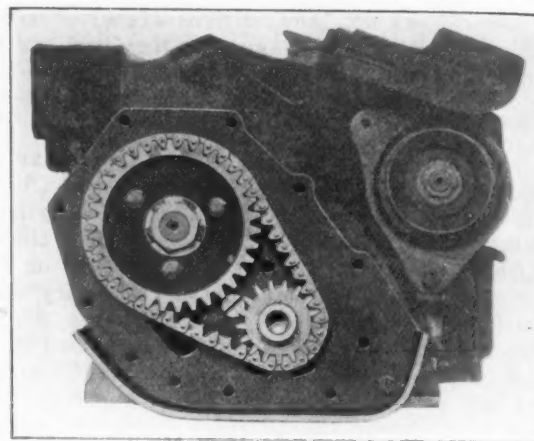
TWO-SPROCKET DRIVE WITHOUT ADJUSTMENT
